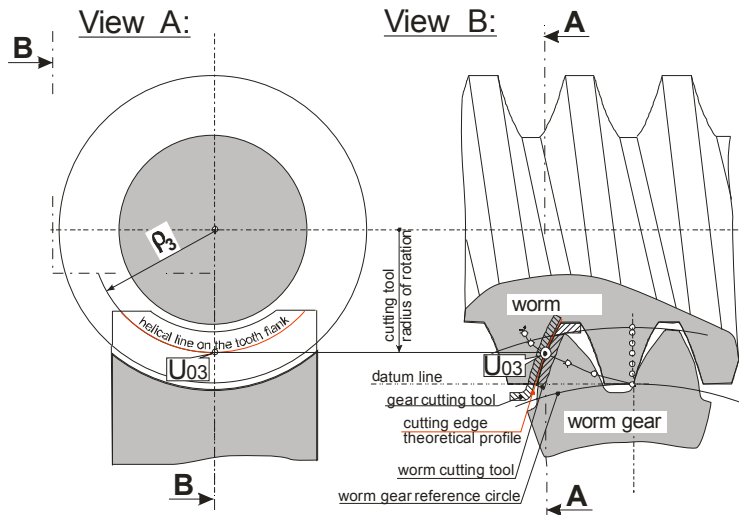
Contact between the worm tooth and worm-gear teeth flanks under manufacturing conditions
